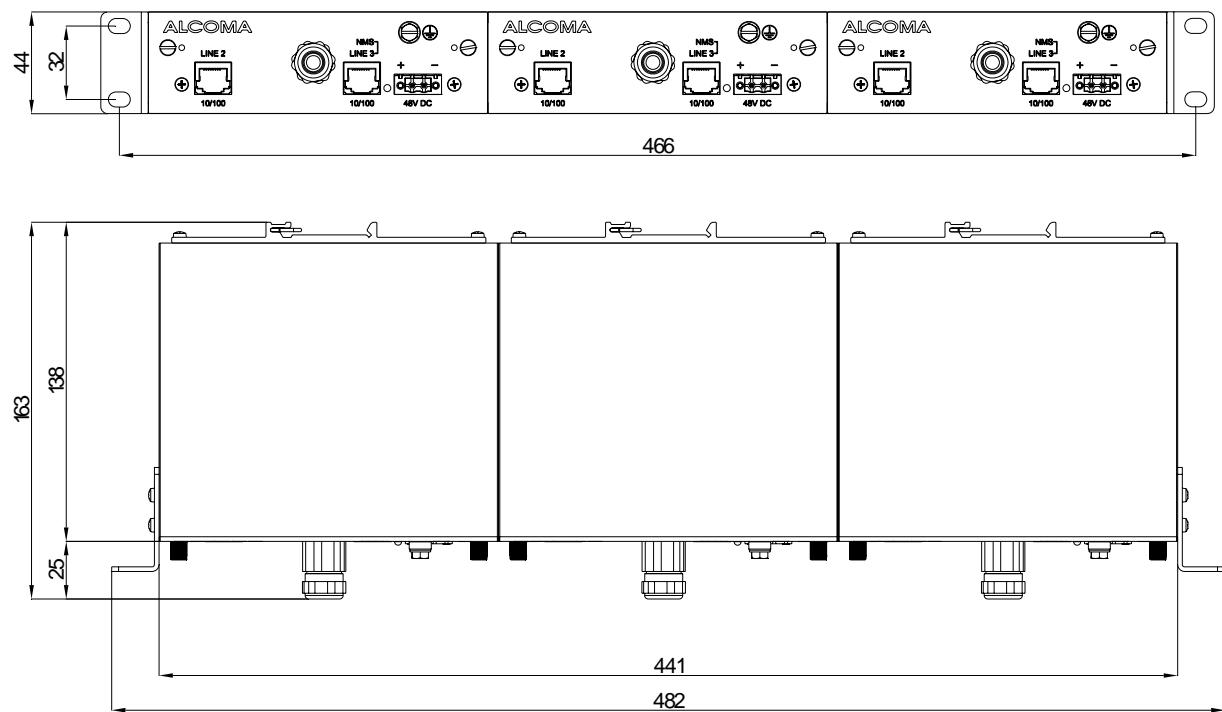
Main dimensions of 3 assembled terminal boxes ALS1x to 19" rack
